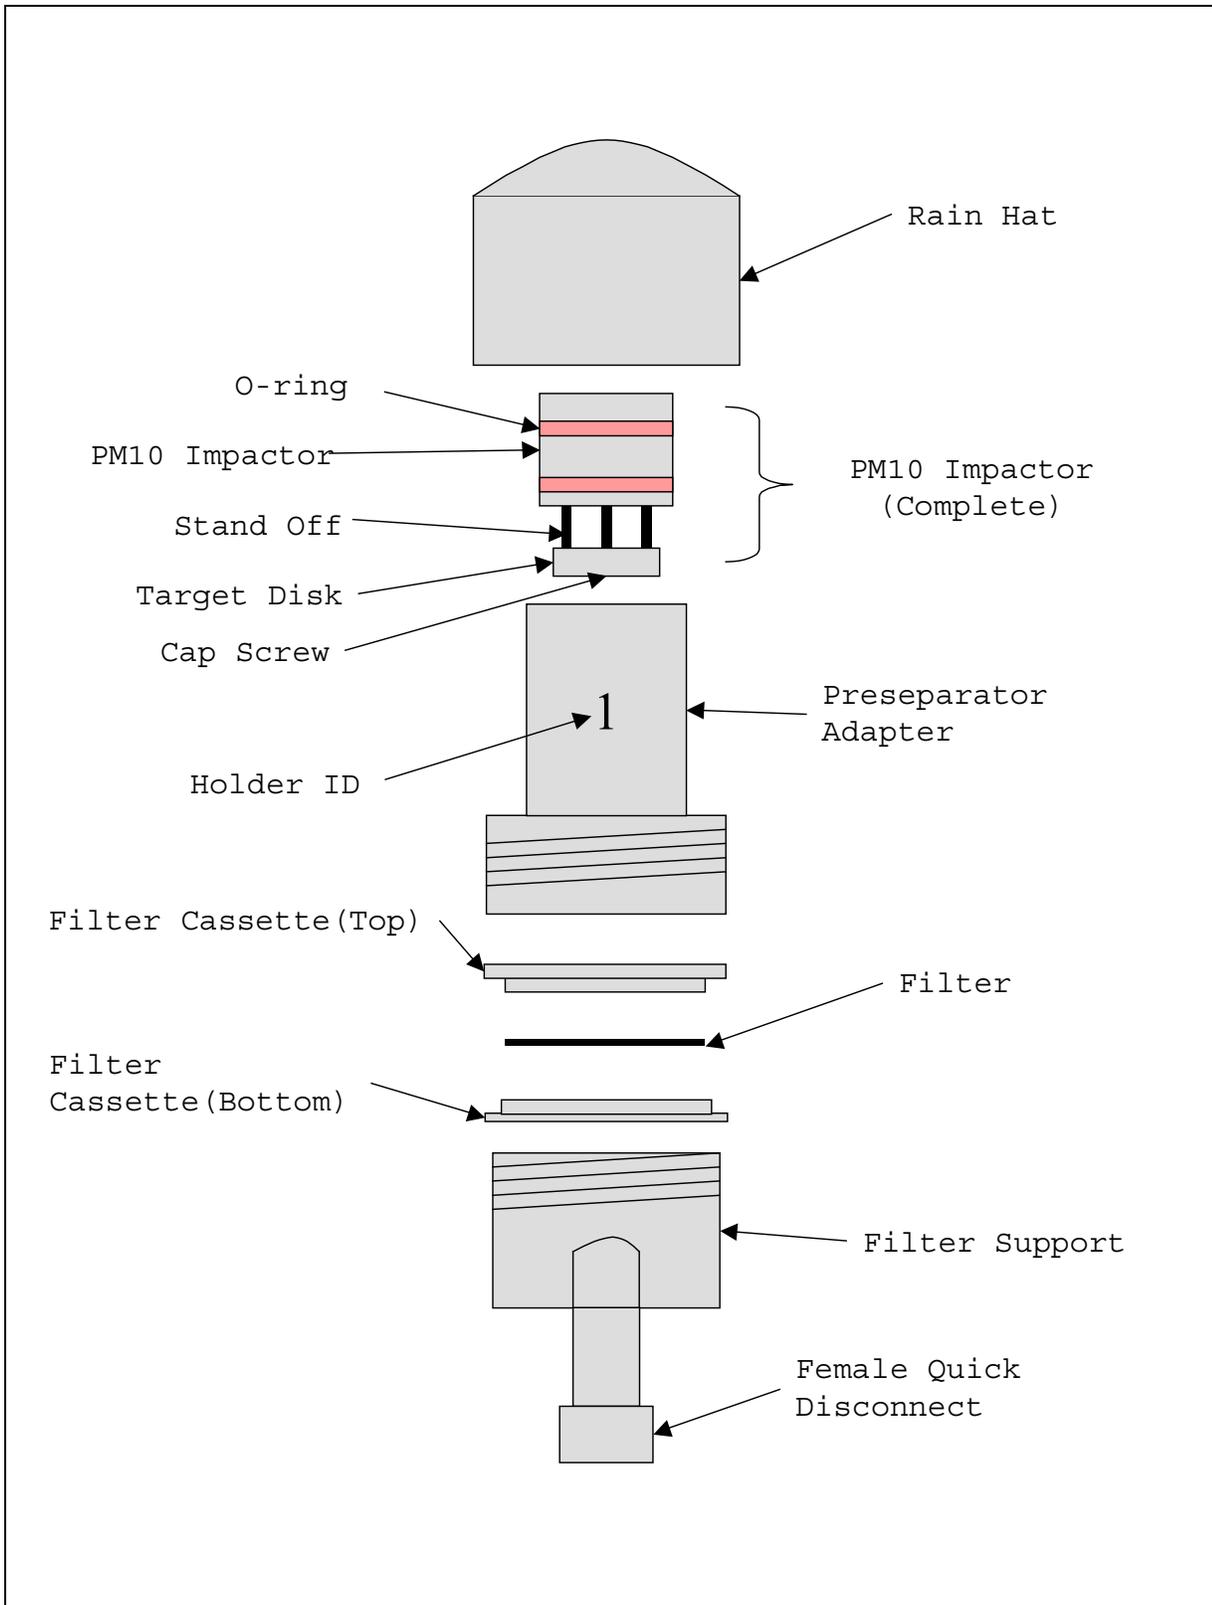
Preseparator/Filter Holder Assembly (V2.0)
